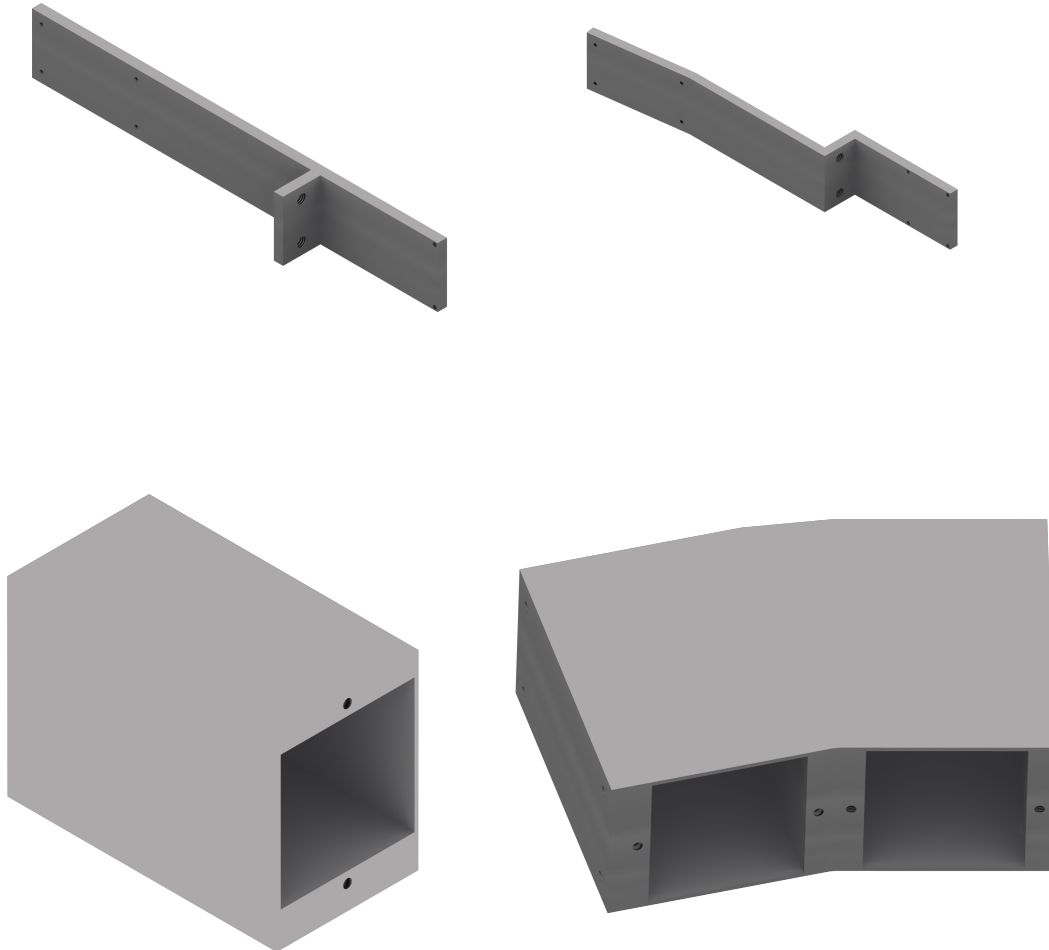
Additional pictures of the first prototype design, left to right, top to bottom: T-beam to hold the housing of the single PMT, T-beam to hold the housing for the two PMTs, housing for the single PMT, housing for the two PMTs.
